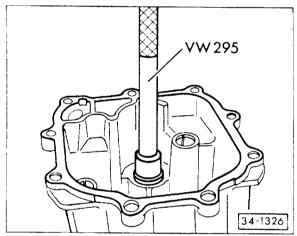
Main shaft needle bearing in gear carrier housing cover, installing
